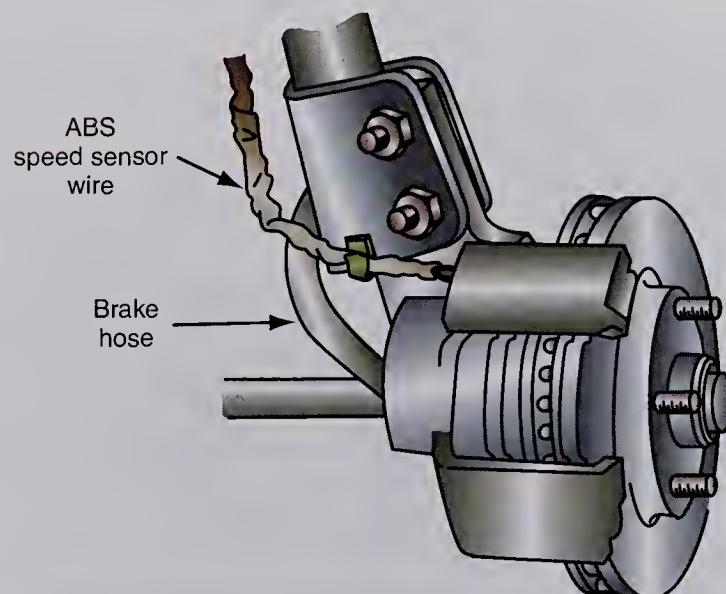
Brake line and ABS wheel-speed sensor wire removed from the strut.
